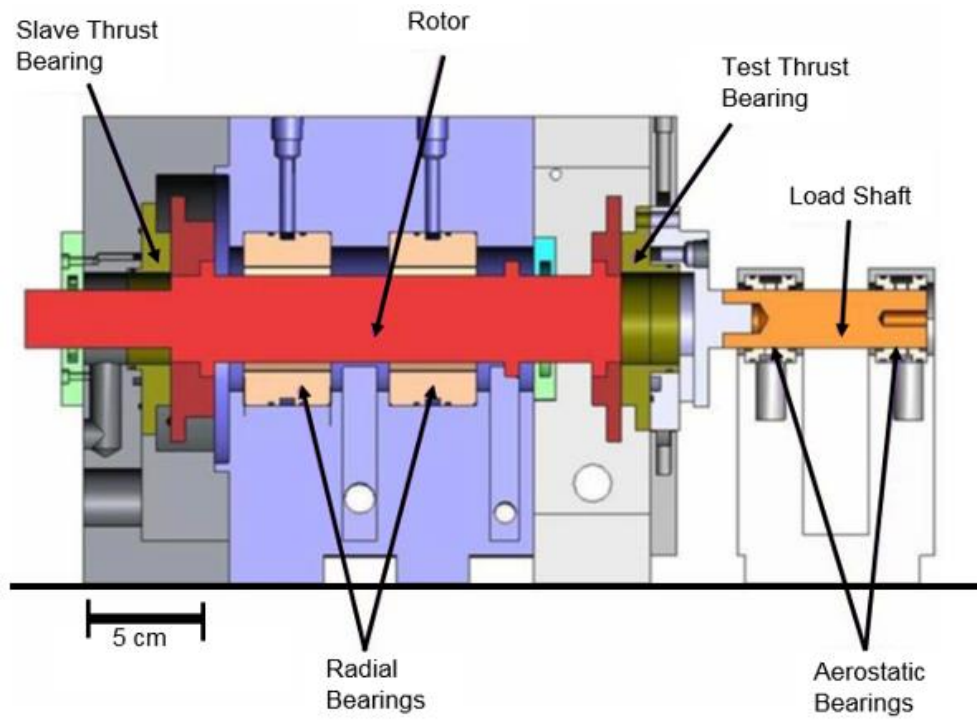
Cross sectional view of thrust bearing test rig. Reprinted from [12].
